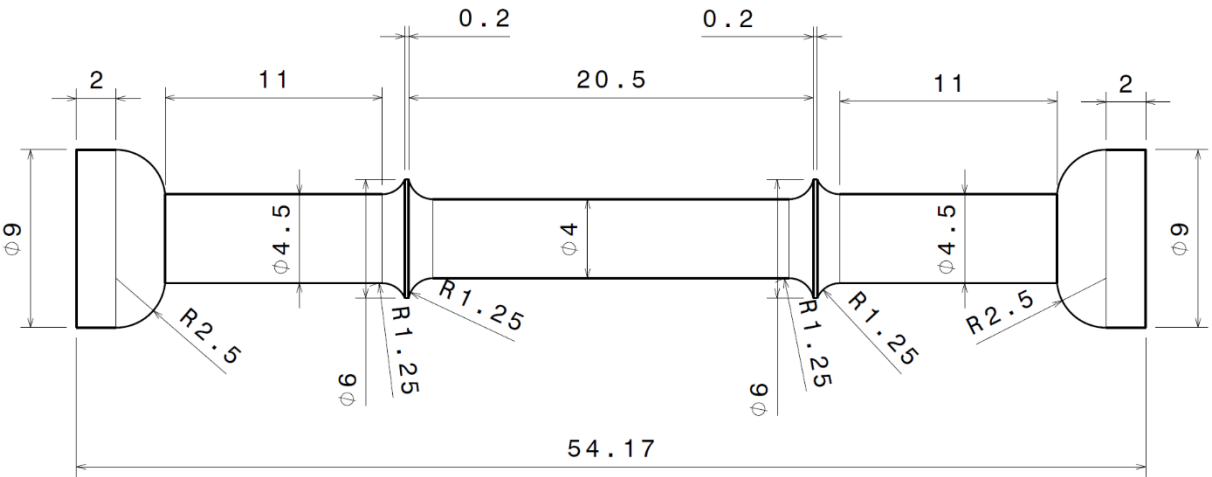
Drawing of the tensile creep specimens produced in the CNC turning lathe, with measure values in mm.
